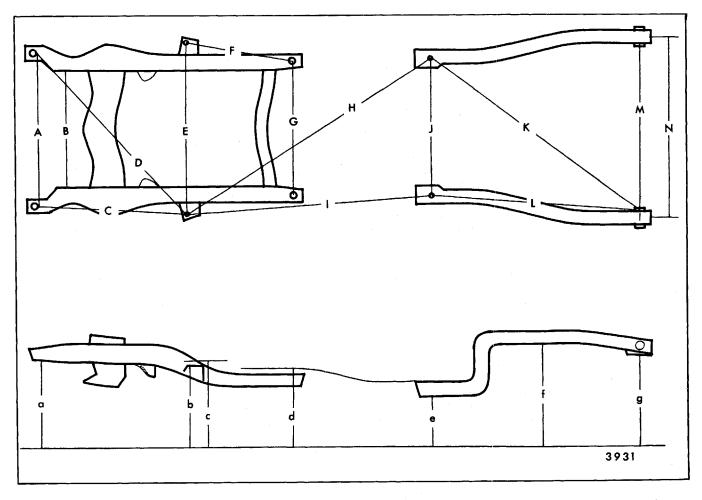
Horizontal and Vertical Checking Dimensions - F Styles
